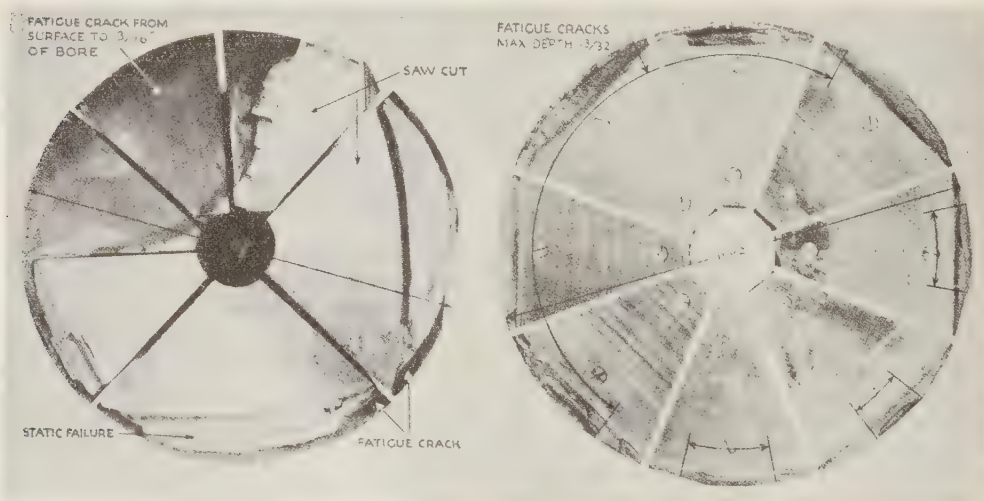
Depths of fatigue cracks in the wheel seat of unrolled axles Nos. 9545 and 9540.
